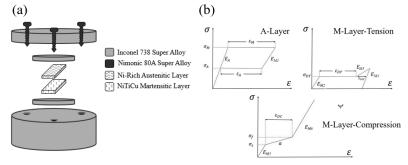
(a) Exploded view drawing for super alloy fixture used in sample construction stage and (b) A schematic for extracting material parameters.
